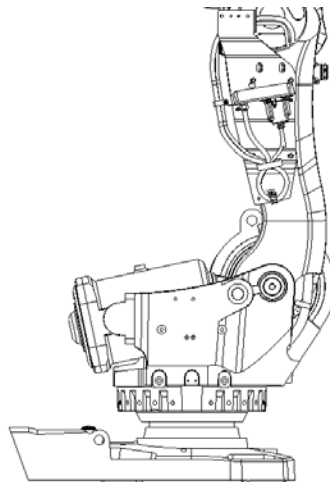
“Orange line” DressPack Lower arm right side view Material handling version.
